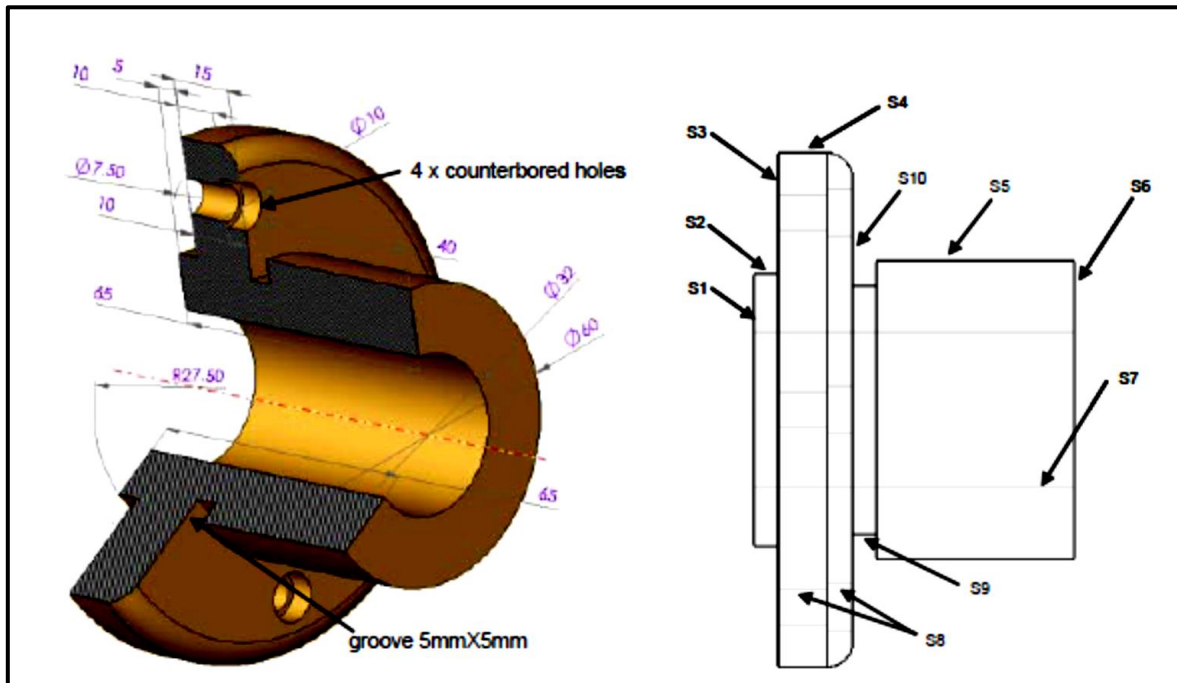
(a) Sectioned view of rotational part (b) The marked surfaces identify removal operations
